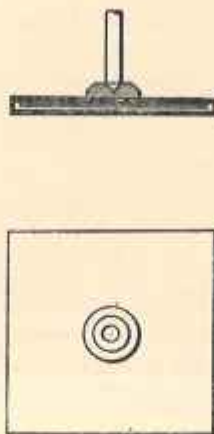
HEARSON'S CAPSULE THERMOSTAT, 1880.
